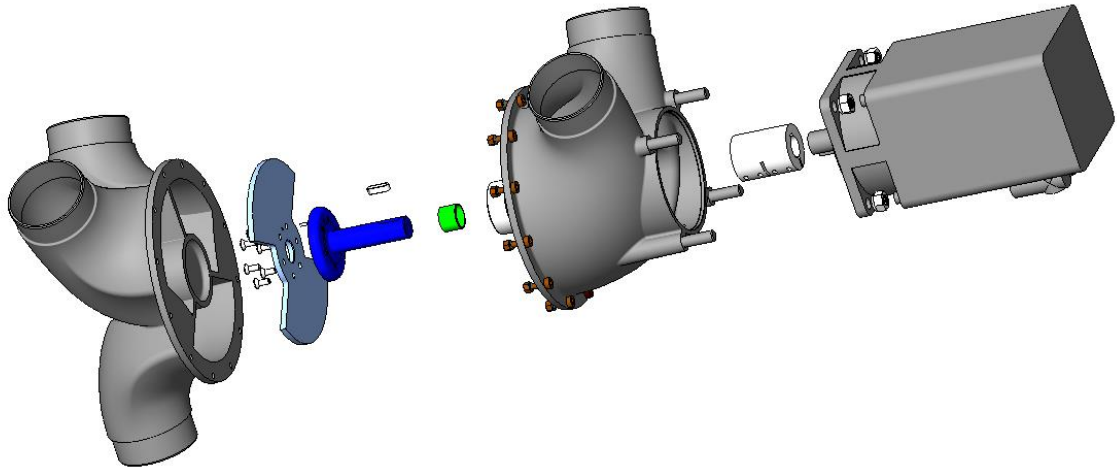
An assembly drawing showing an exploded view of the final valve design and symmetric disk.
